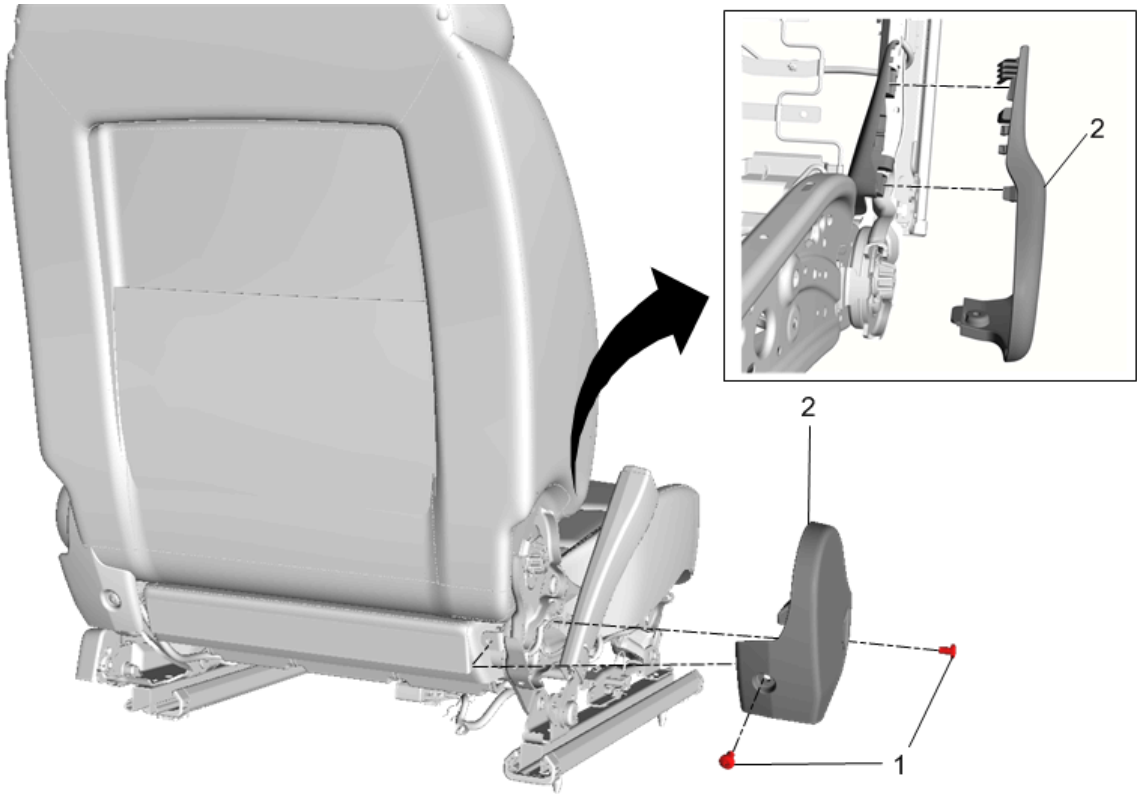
Driver or Passenger Seat Inner Adjuster Front Finish Cover
